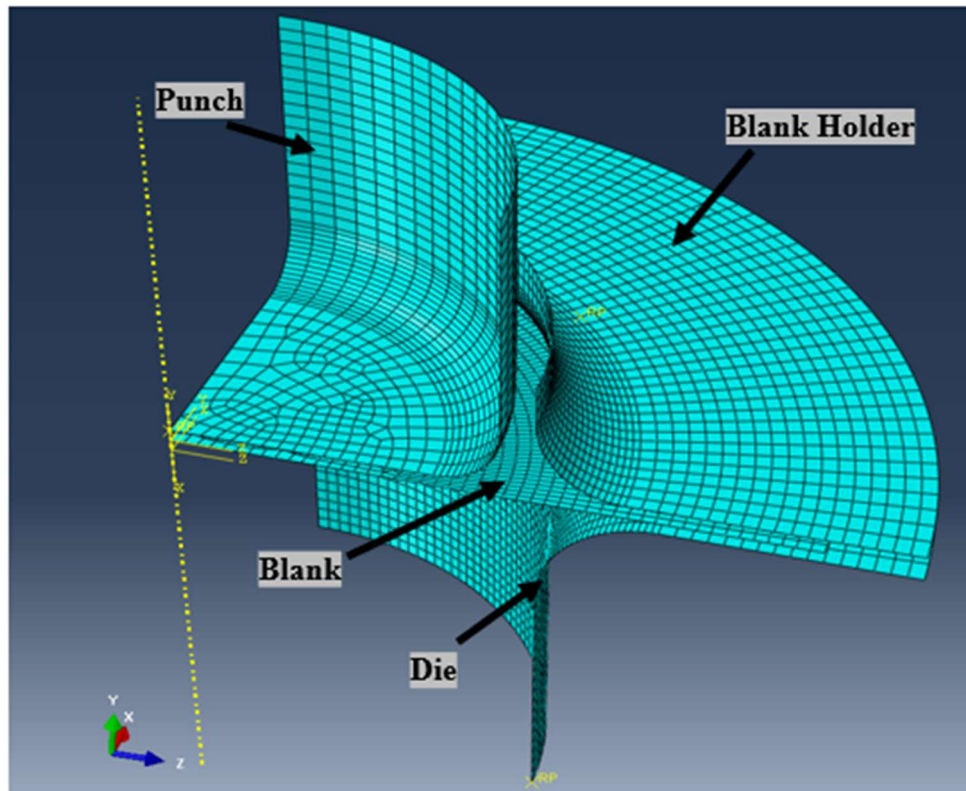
A quarter symmetric 3D model of deep drawing assembly.
